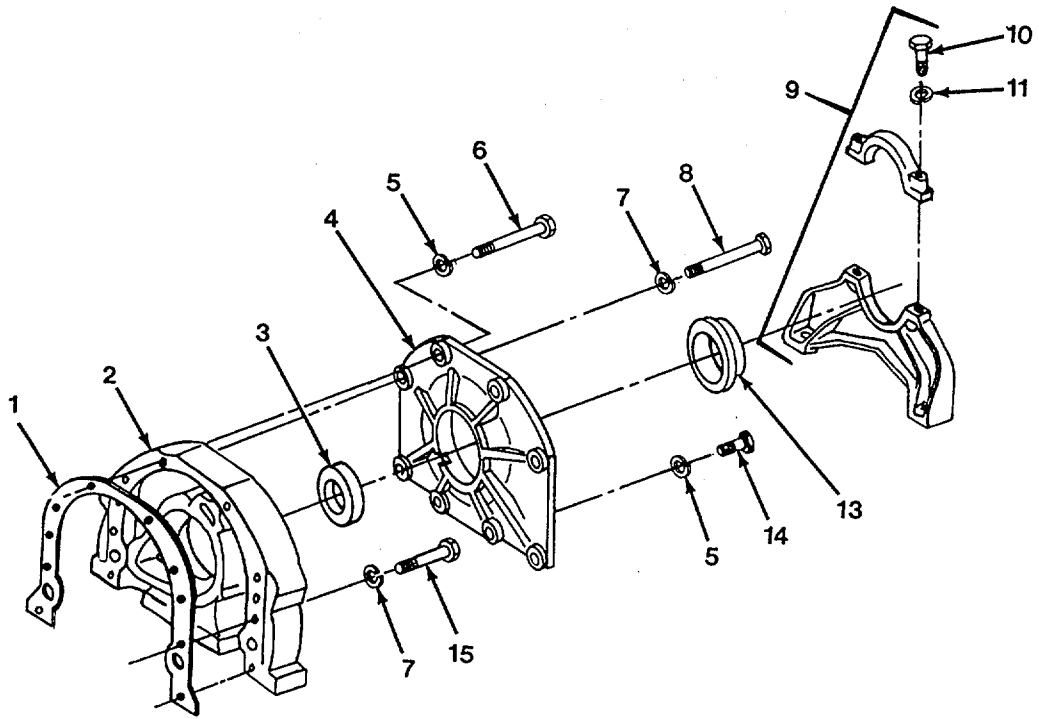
Crankshaft Cover, Trunnion and Oil Seal
